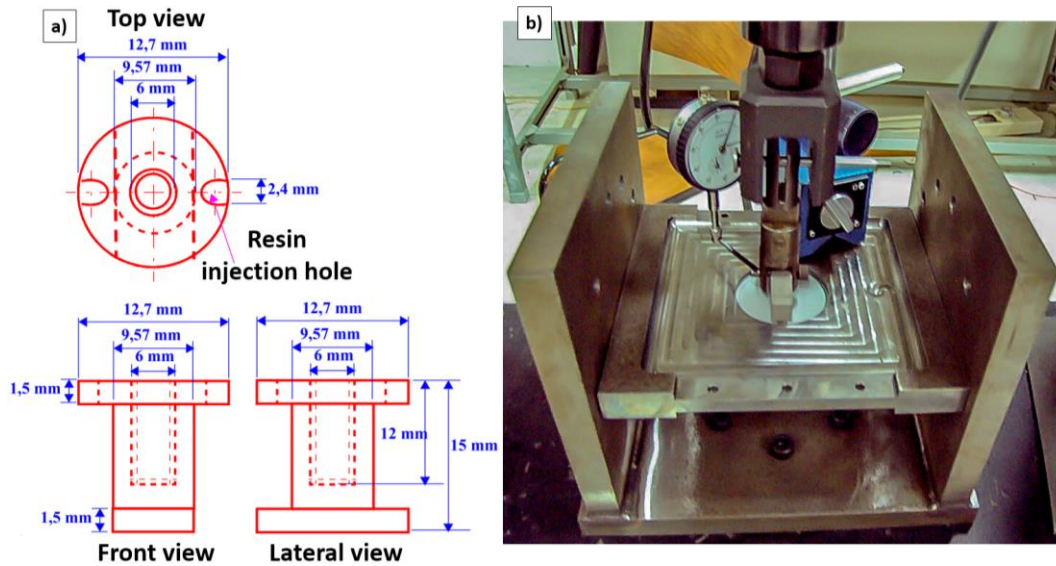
a) Size of the fastener, b) set-up for the performed pull-out tests [15].
